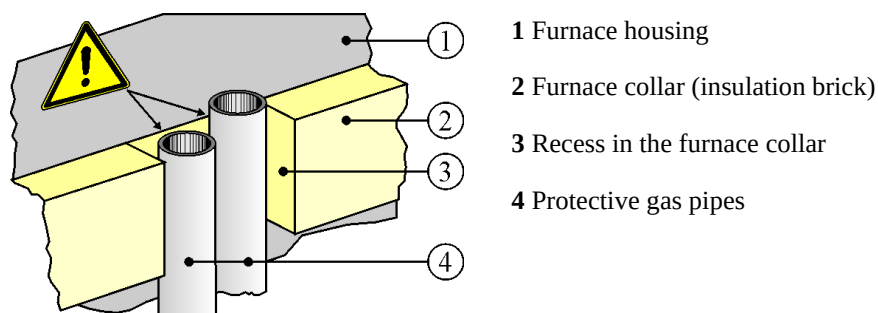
Pay attention to the furnace collar and the protective gas pipes (similar to picture)
